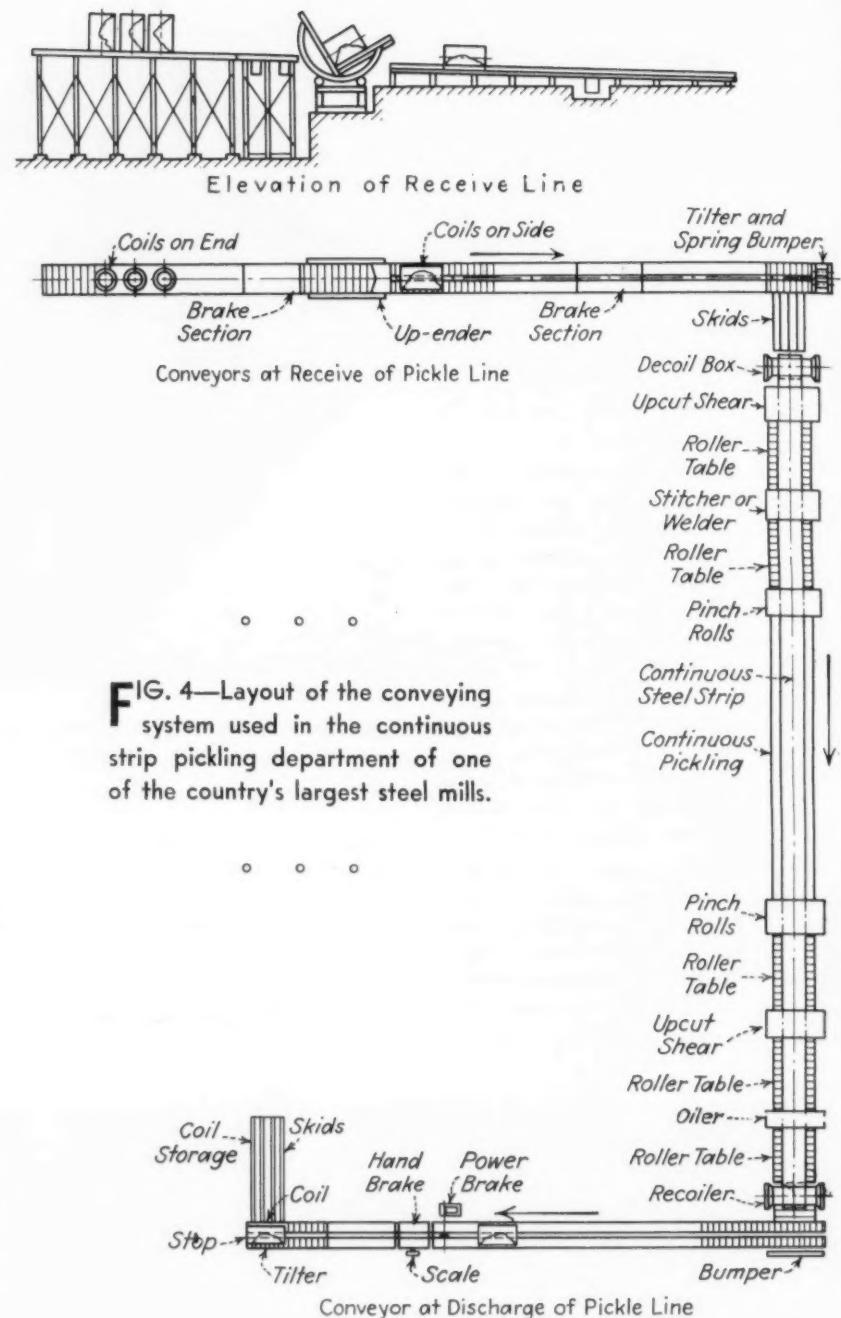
Layout of the conveying system used in the continuous strip pickling department of one of the country's largest steel mills.
